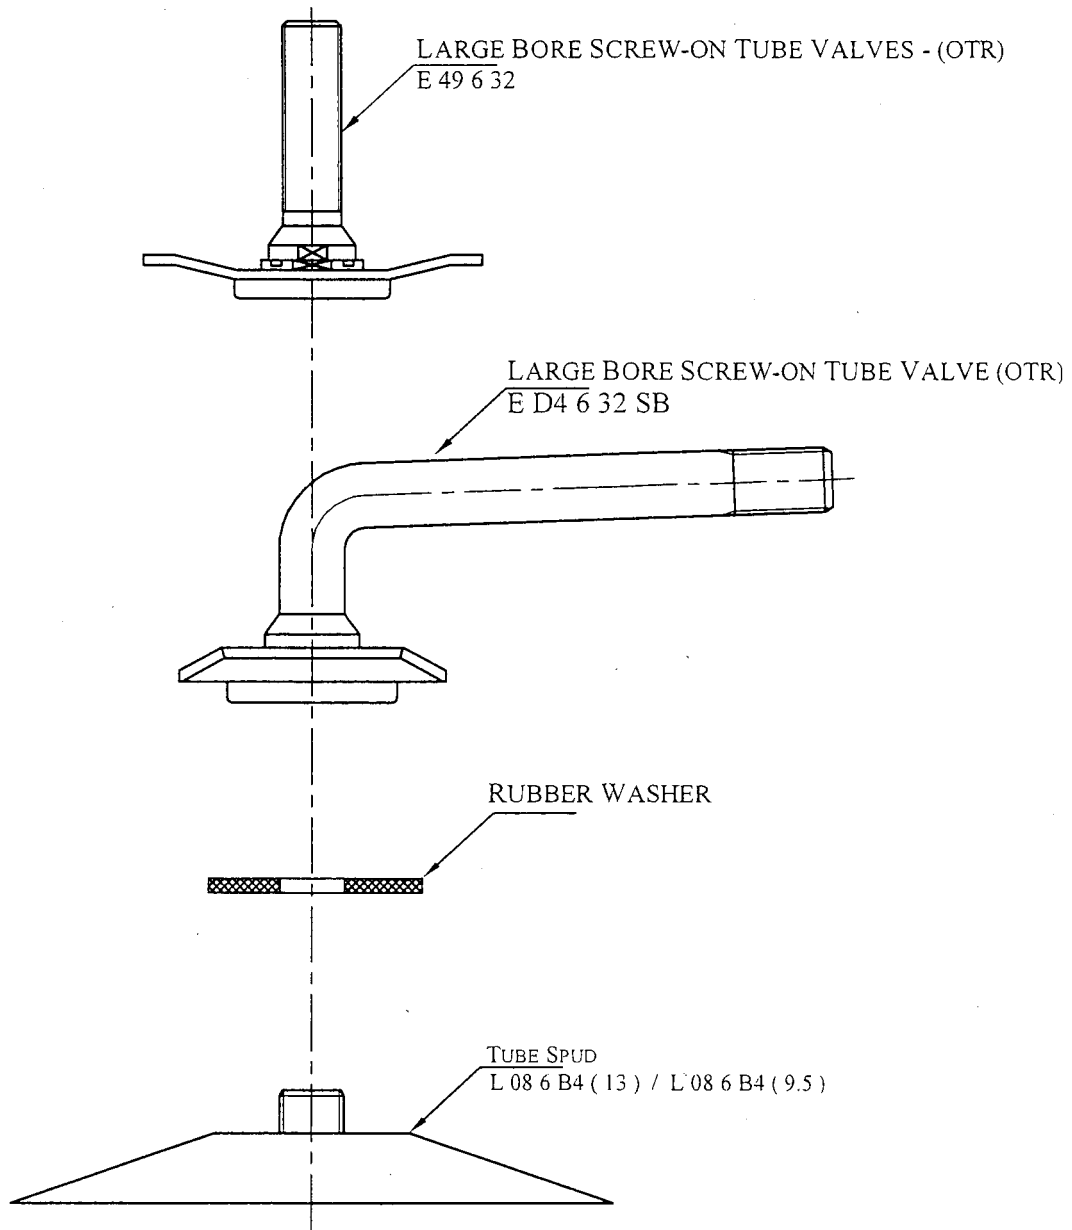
LARGE BORE SCREW-ON TUBE VALVE — (OTR) E 49 6 32
